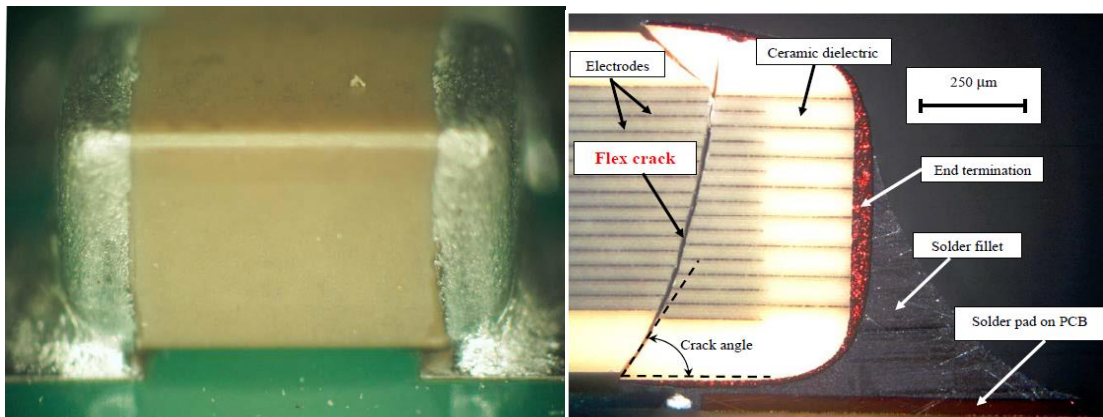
MLCC on PCB and Flex Cracking in Multi-Layer Ceramic Capacitor. [1]
